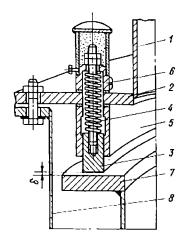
Sealing of regenerative air heater t—wall of gas-supply pipe; 2—cover flange; 3—block; 4—spring; 5—guide plate screwed to flange; 6—cap screwed to flange; 7—rotor flange; 8—cylindrical casing; 6—gap
